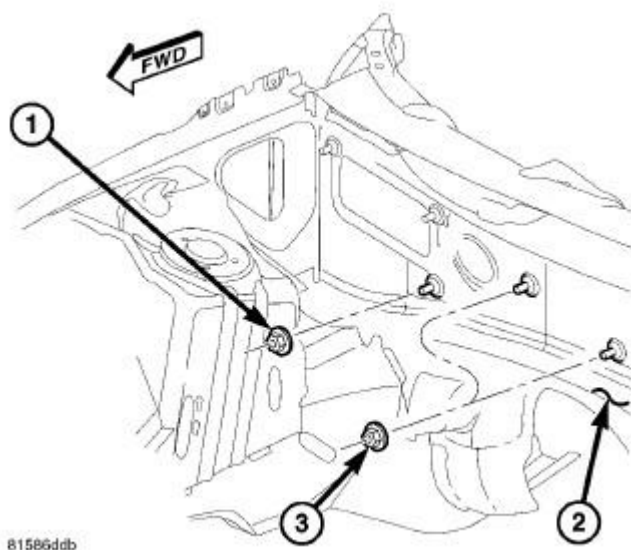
Housing-HVAC-Exterior Removal & Installation
